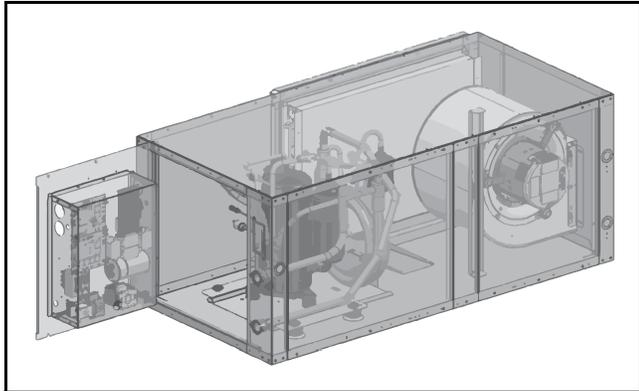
Swing-Out Electrical Box on a Horizontal Unit
